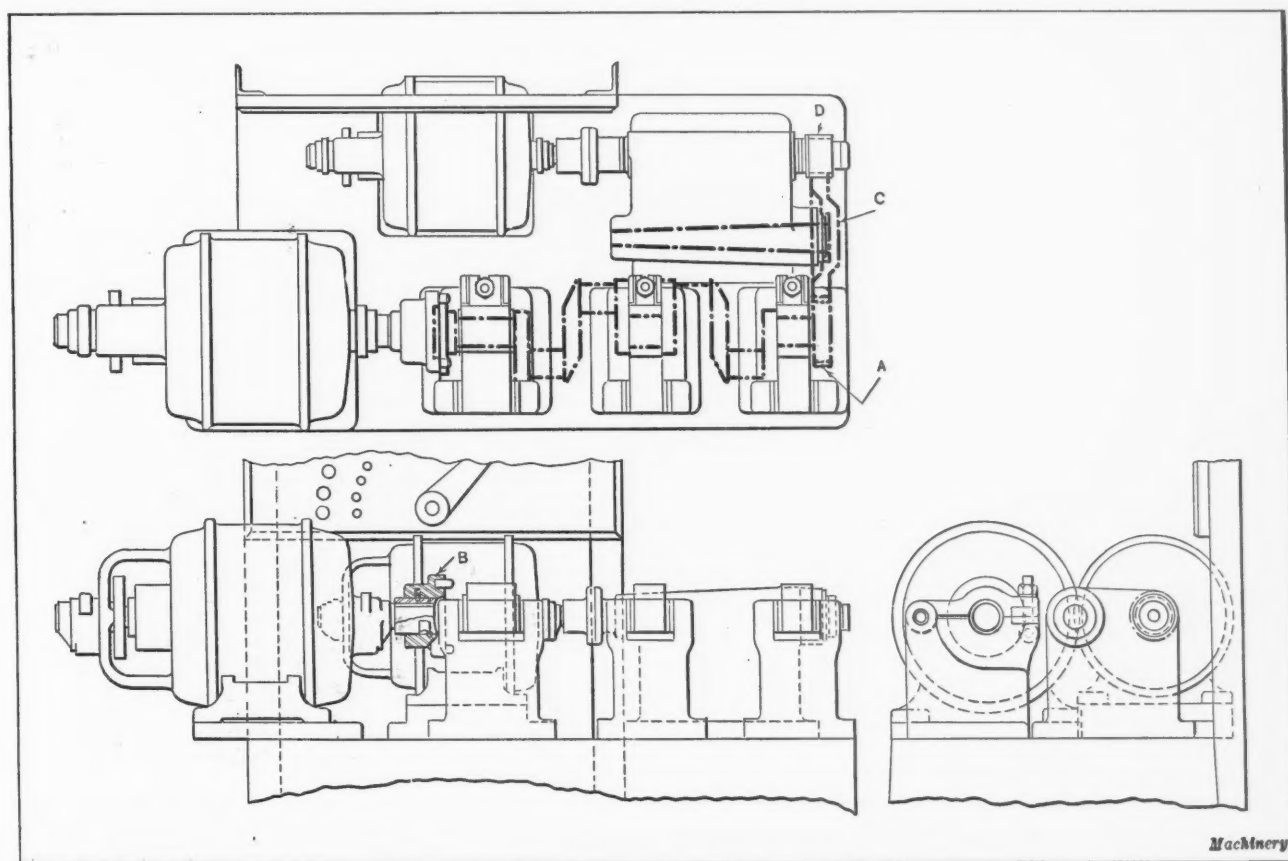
Test Stand used to detect Defects in Timing Gears after they have been assembled
